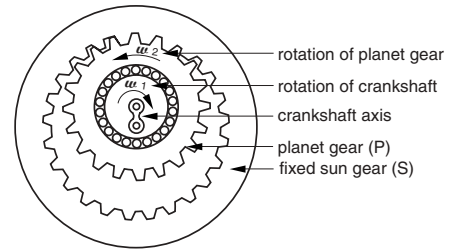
Epitrochoid Planet Gear-Circular(PIN) Tooth Sun Gear Combination
